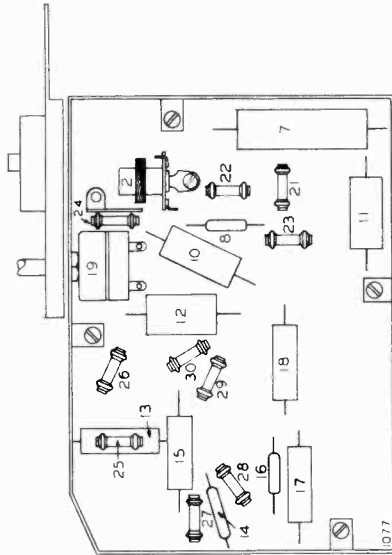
PARTS LOCATING DIAGRAM PORTABLE RADIO #985651
